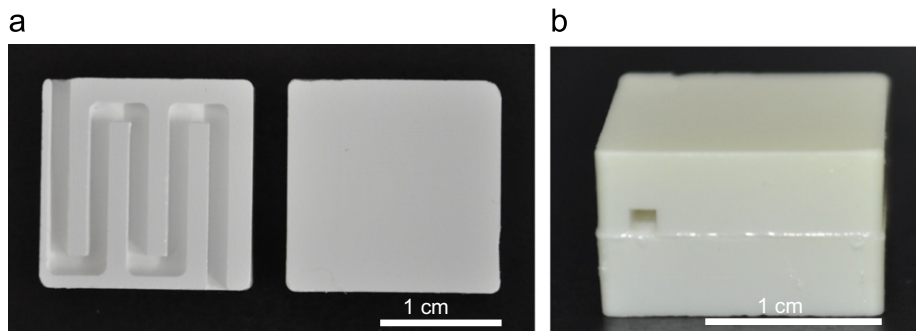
Photographs showing (a) the to-be-joined external surfaces of the ZrO₂ green bodies before joining and (b) their joined body after co-sintering heat-treatment. Note that a channel pattern was formed by machining on the external surface of one of the green bodies.
